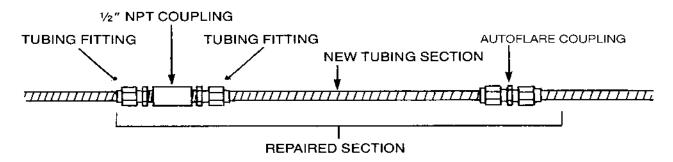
Repair of Damaged Tubing with a New Section of Tubing and a joint splice or an AutoFlare Coupling
